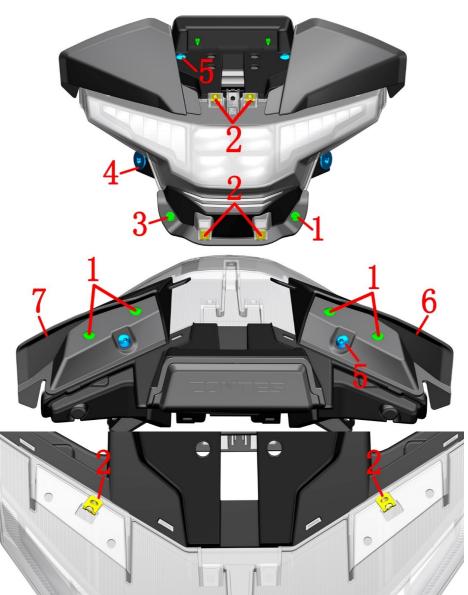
FRONT FORK		Headlamp assembly 2	CHK	Q
